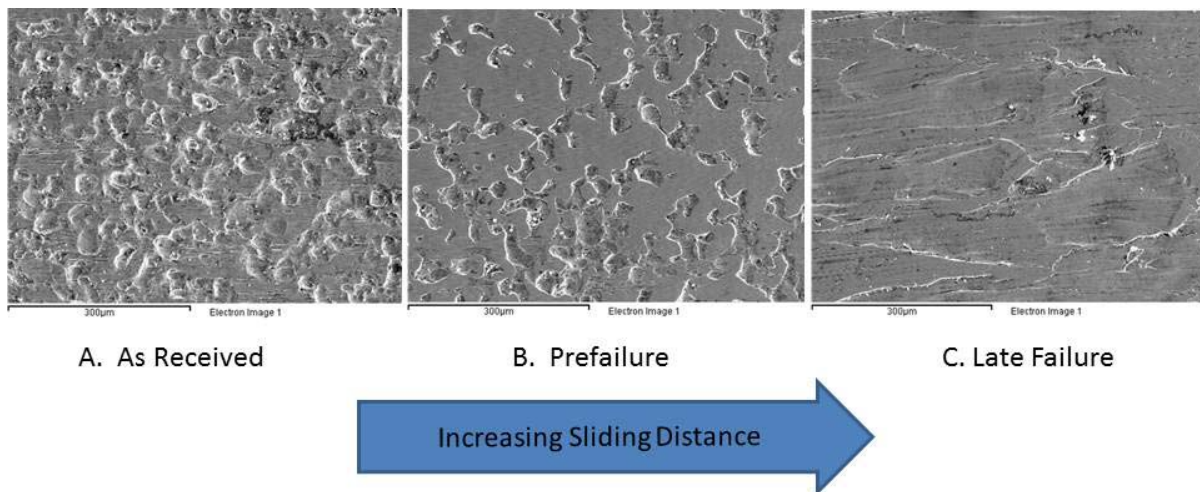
Sheet surface a) As-rec'd, b Pre-failure (note: burnishing and lubricant pockets), C. Late adhesive failure (smearing of surface). Cold-rolled sheet with low viscosity lubricant.
